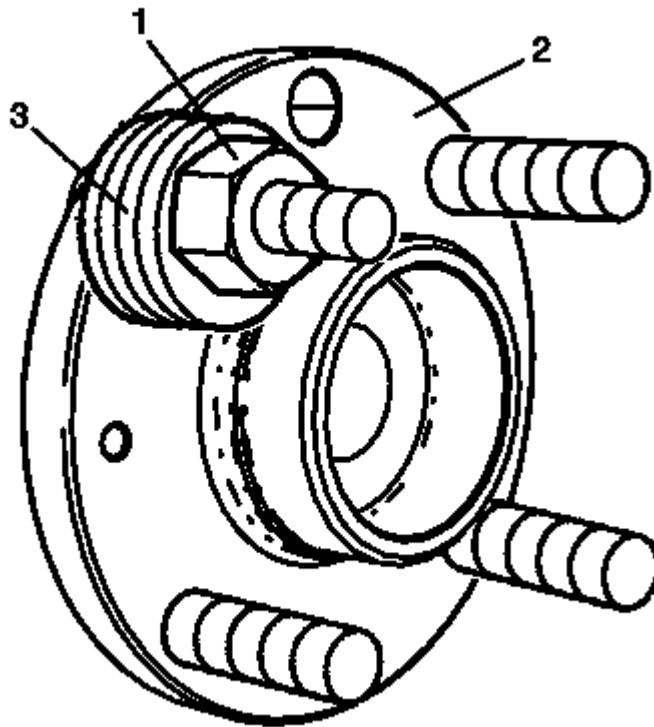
Wheel Hub Flange, Lug Nut And Washers
